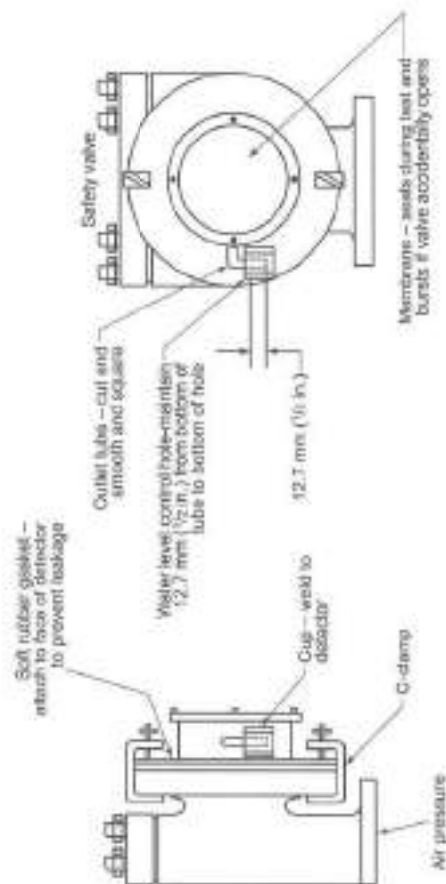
Device to Relieve Body Pressure Caused by Accidental Popping of the Valve
